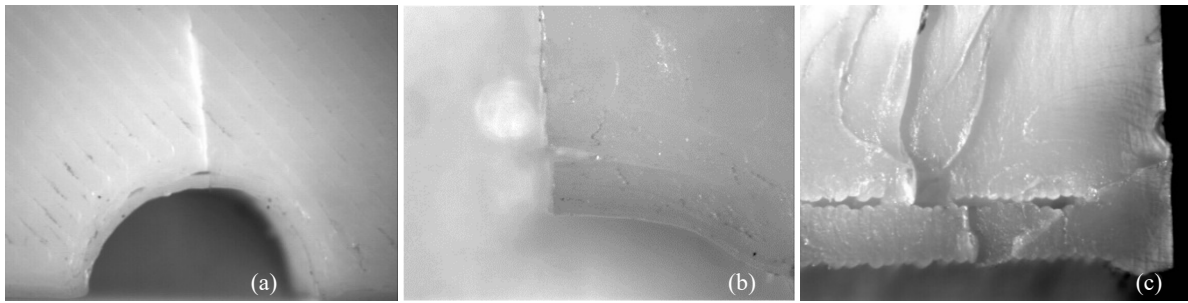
Observed problems: (a) inaccuracy on filament positioning, 6 $\times$ ; (b) Detail of the fracture surface, 25 $\times$ , (c) fracture surface, 25 $\times$ .
